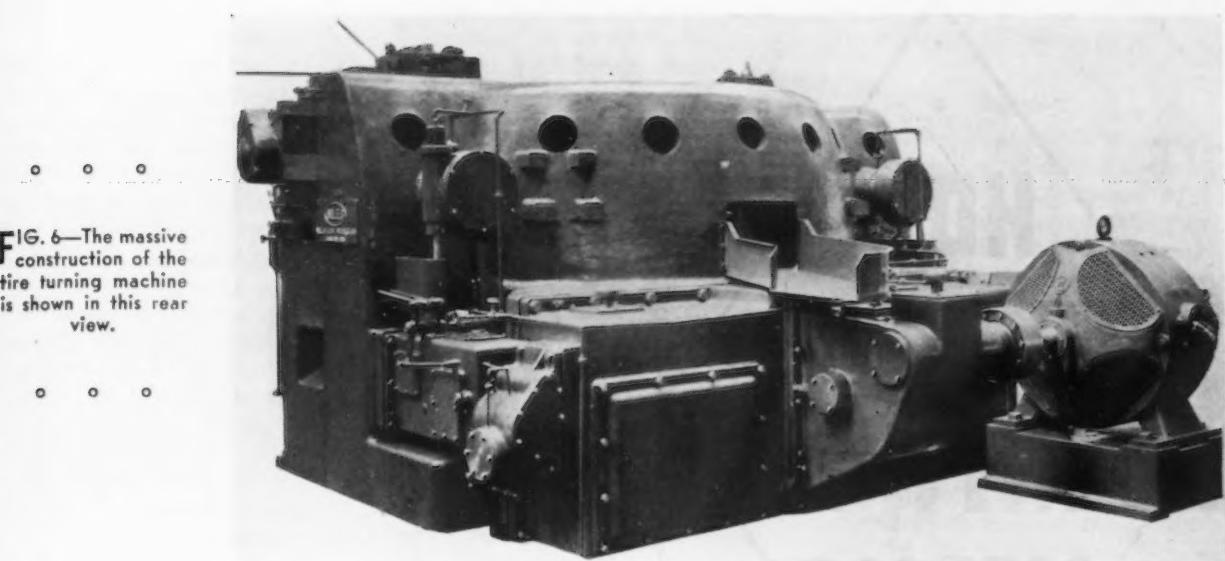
The massive construction of the tire turning machine is shown in this rear view.
